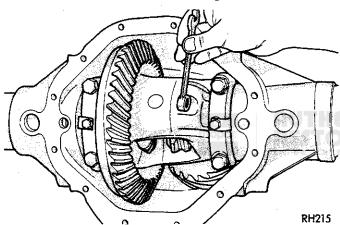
Pinion Gear Mate Shaft Lock Screw
